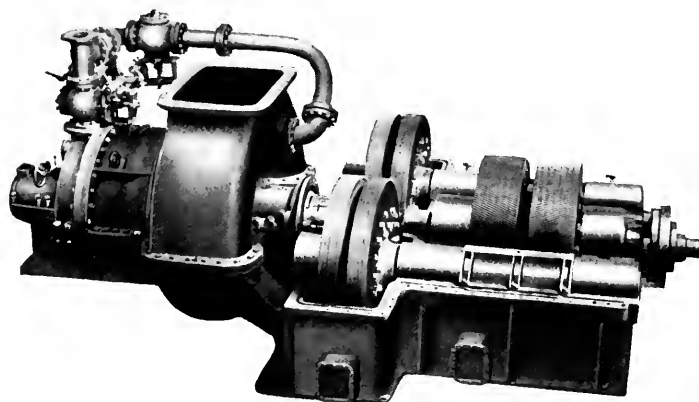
Curtis Turbine and One Plane Flexible Type Speed Reduction Gear for Ship Propulsion. Top Half of Gear Housing Removed
